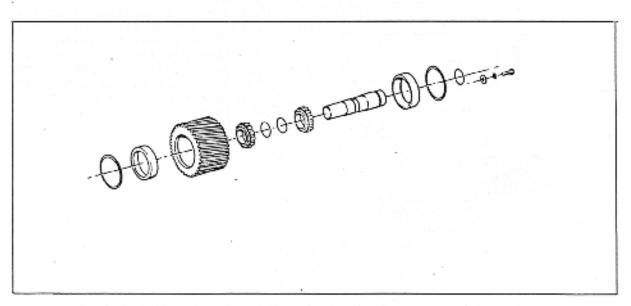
Exploded View Showing Idler Parts in Sequence of Assembly
